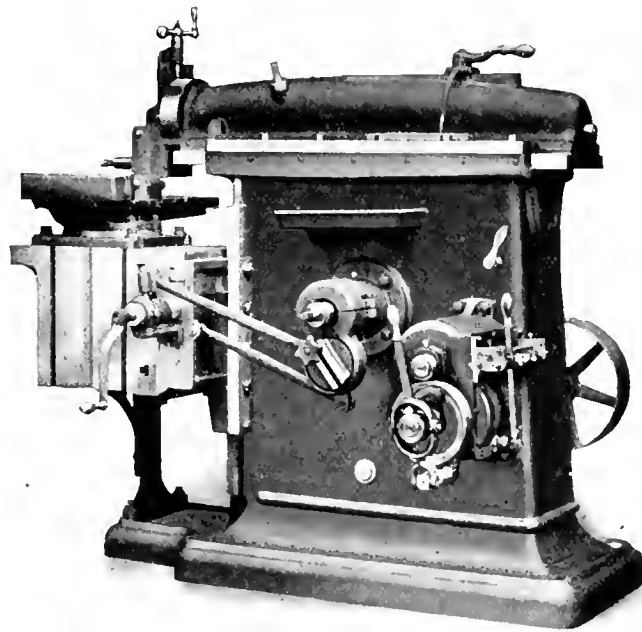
Quick Change Gear Drive for Queen City Shaper.
